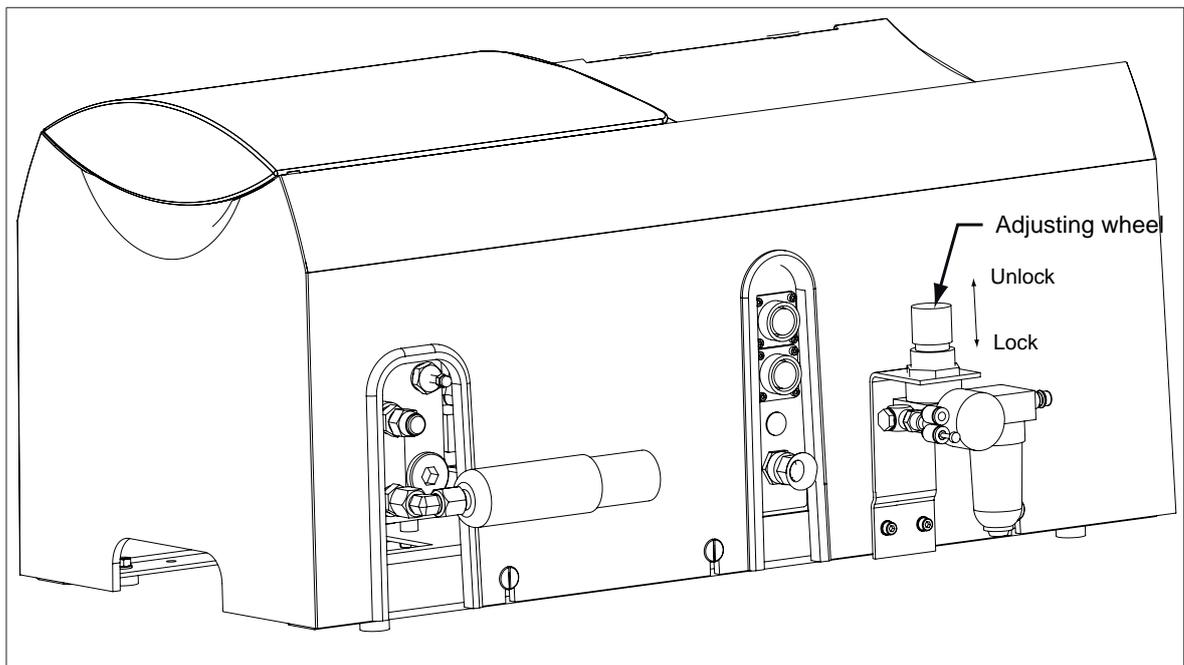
/1: Adjusting wheel for spray air setting (HS version)
